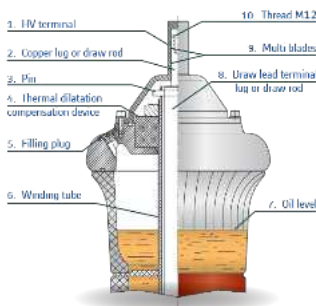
H1 head type (Draw lead or draw rod up to 170 kV)
